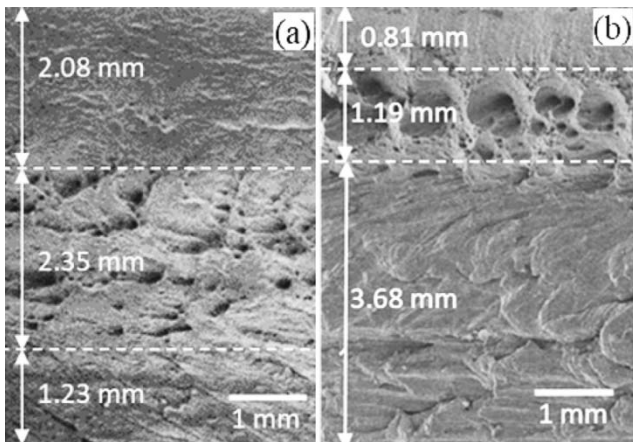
Fracture cross-section of (a) weld 4 and (b) weld 17.
